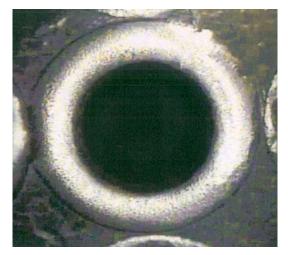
Visual inspection for Tube End Sleeved Welding
